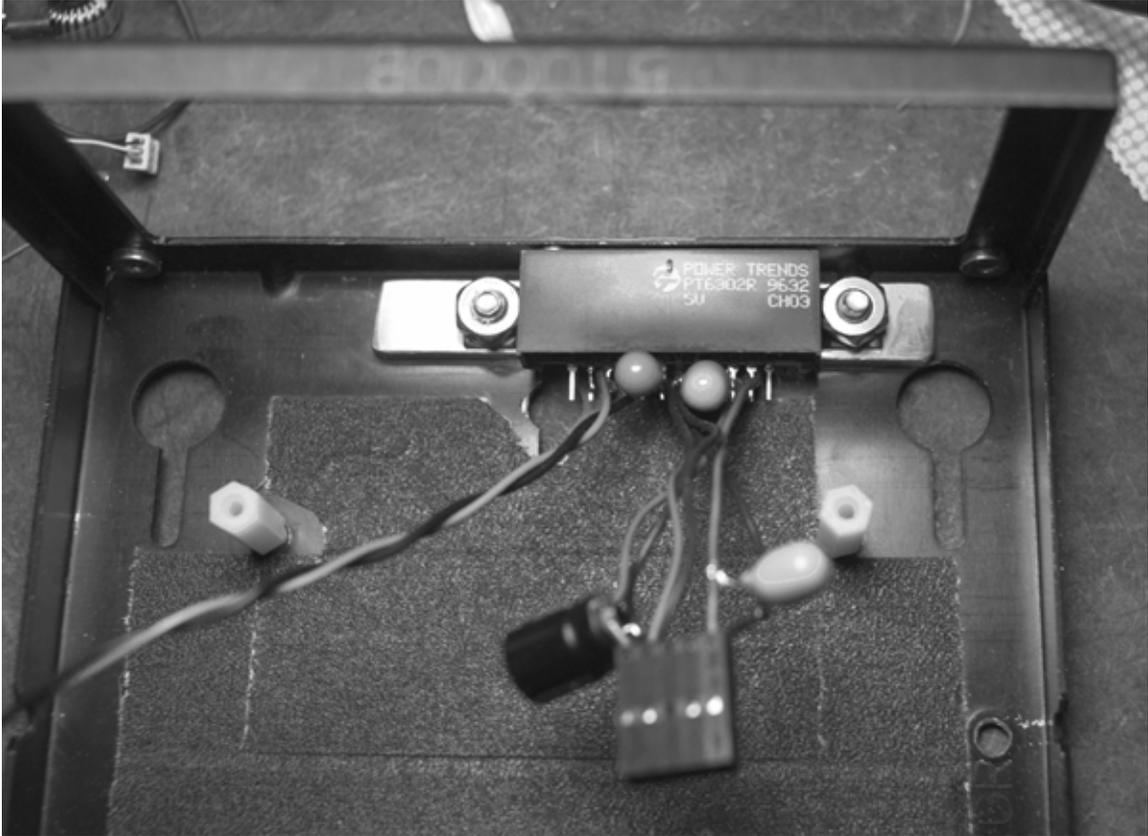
The pt6302 ISR is installed near the front of the enclosure, facing inwards. Locate it so that the power cable emanates from directly below where the power connector is located on the PC104 CoreModule. Note the aluminum shim I have bolted underneath the ISR to keep the pins from touching the case. Be careful not to locate objects near pin 12 (the sense pin) of the ISR. For example, if the disk cable comes too close to pin 12, stray emissions will affect the computer and make it unreliable. Touching pin 12 when the computer is running will generally cause a spike of sufficient strength to reboot the computer. If you don't need it, you might consider breaking it off or cutting it short so it doesn't act like a receive antenna.
